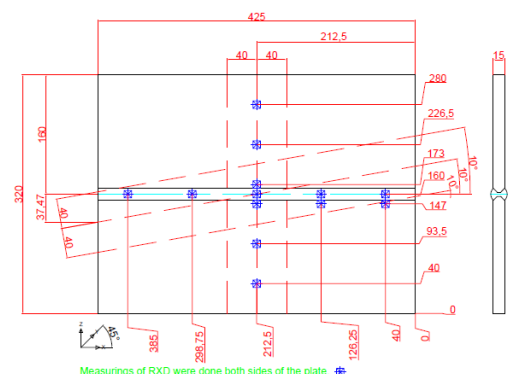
Dimension of MAG and LAHW welds, some X-ray diffraction measuring points (blue points) and EDM cutting dotlines.
